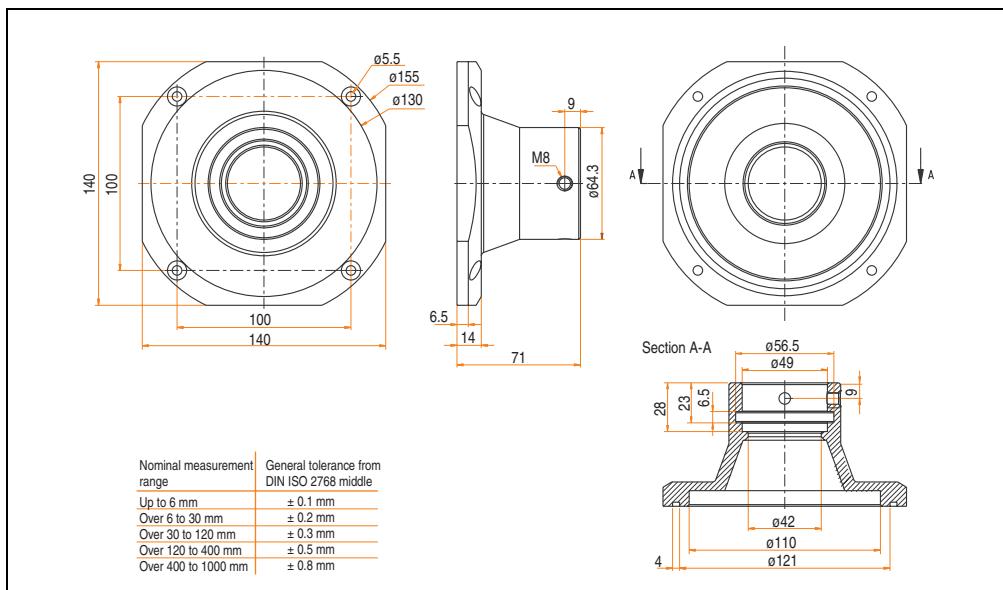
Dimensions - extension flange 5AC800.FLG1-00
